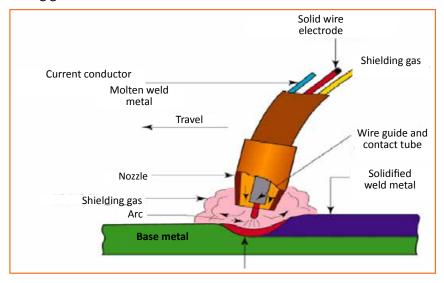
Gas Metal Arc Welding
